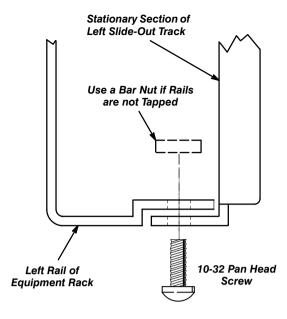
Attaching the Slide-Out Tracks in Front of the Equipment Rack Rails
